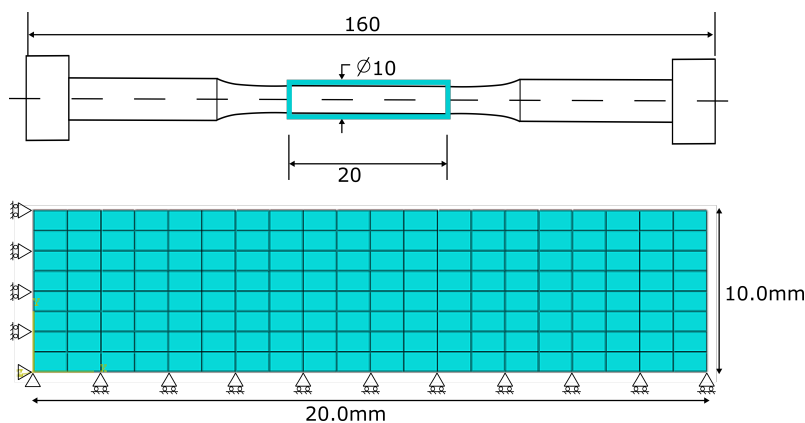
Thermo-mechanical test specimen (all dimensions in mm) [5]
